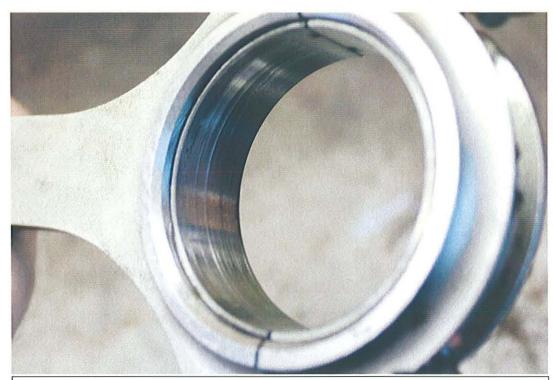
#378R: Indication of metal to metal contact on cylinder #2 connecting rod bearing (image cropped)
